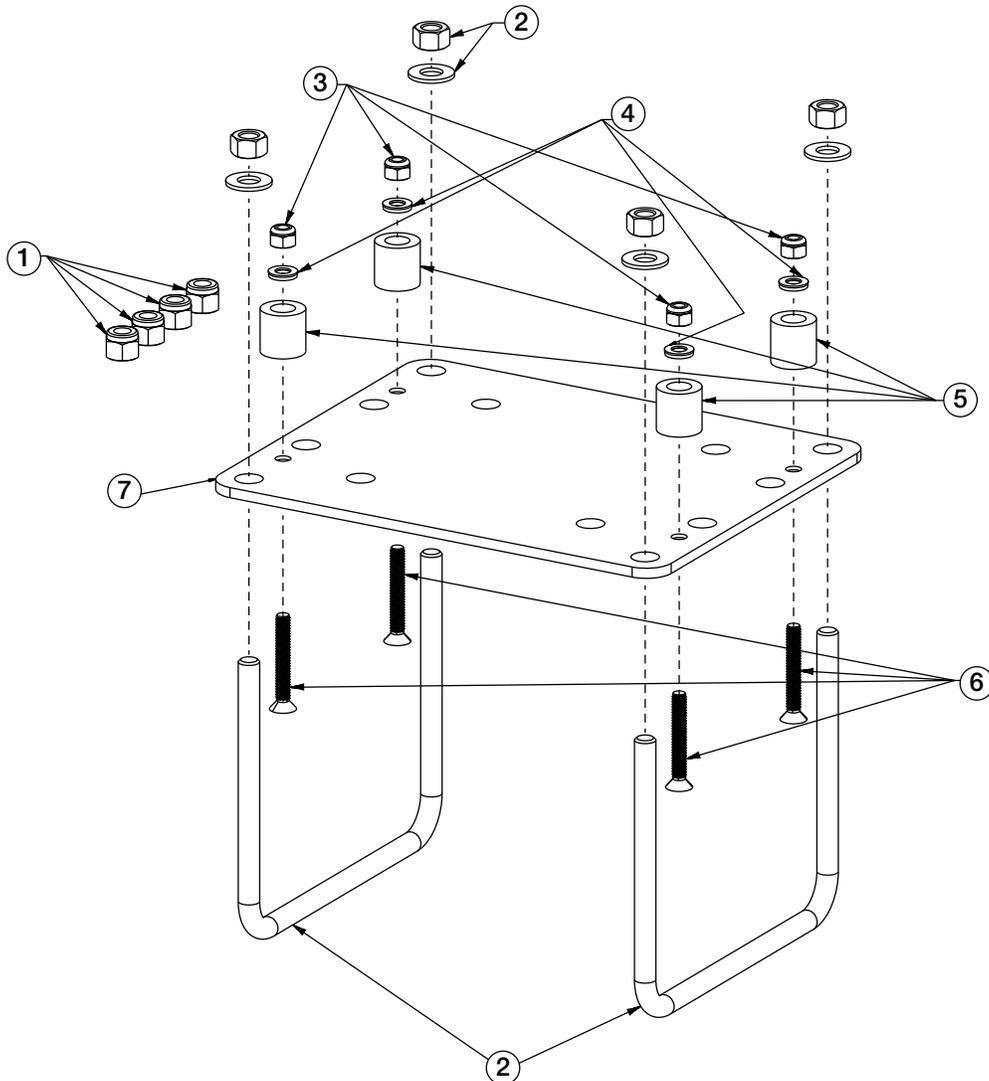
Plate Assembly, Power/Communication Box Cage Mount (For PN 125394)
